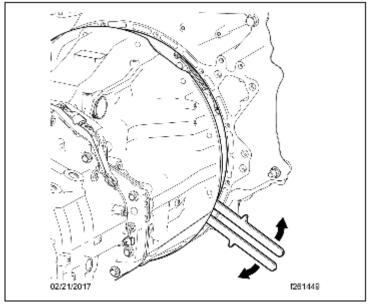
, Aligning the Input Shaft Splines with the Clutch
